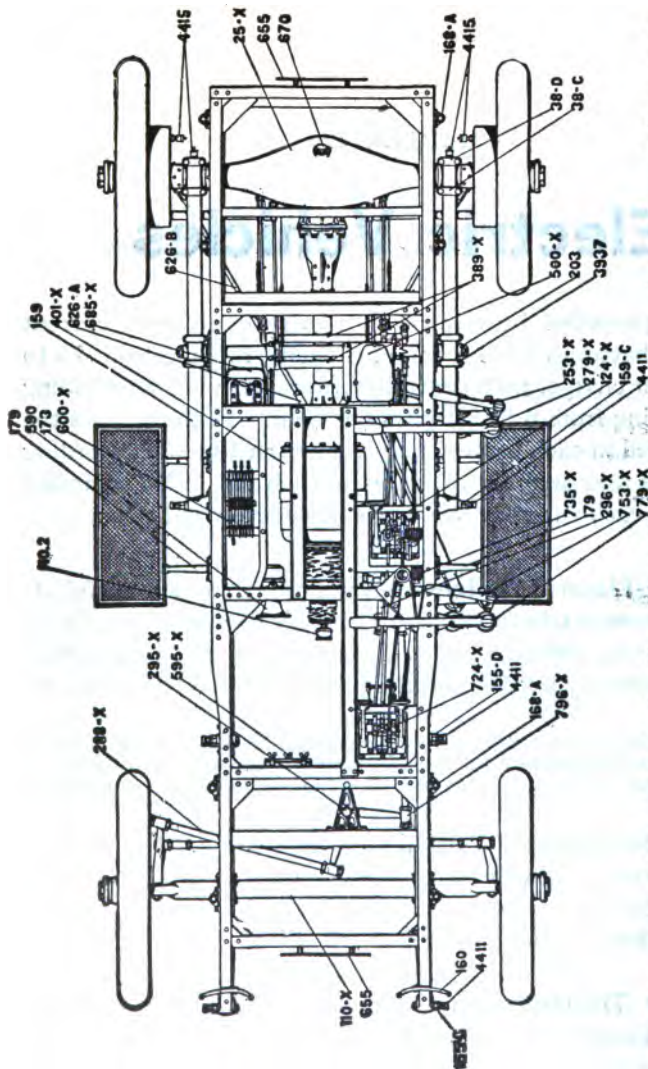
,052.—Plan view of Baker electric chassis. The parts are: 25-X, rear axle; 38-C, rear spring yoke front; 38-D, rear spring yoke rear; 110-X, front axle; 124-X, front levers, rear; 155-C, front spring bolt, front; 155-D, front spring bolt, rear; 159, rear spring; 159-C, rear spring bolt; 160, head lamp bracket; 168-A, fender bracket; 173, step pad; 179, step bracket; 203, rear spring seat, center; 253-X, rear control mast; 279-X, steering mast; rear; 288-X, lower steering rod, bell crank to spindle; 295-X, bell crank; 296-X, lower steering rod, mast to mast; 389-X, brake shaft; 401-X, motor; 500-X, controller; 590, horn; 595-X, fuse box; 600-X, resistance; 626-A, brace rod clevis; 626-B, brace rod; 655, license bracket; 670, oil inlet; 685-X, contactor; 724-X, foot levers, front; 735-X, interlock; 733-X, front control mast; 779-X, steering mast, front; 796-X, lower steering rod, mast to bell crank; 3,937, rear spring clip; 4,411, 4,415, No. 2 grease cups.
